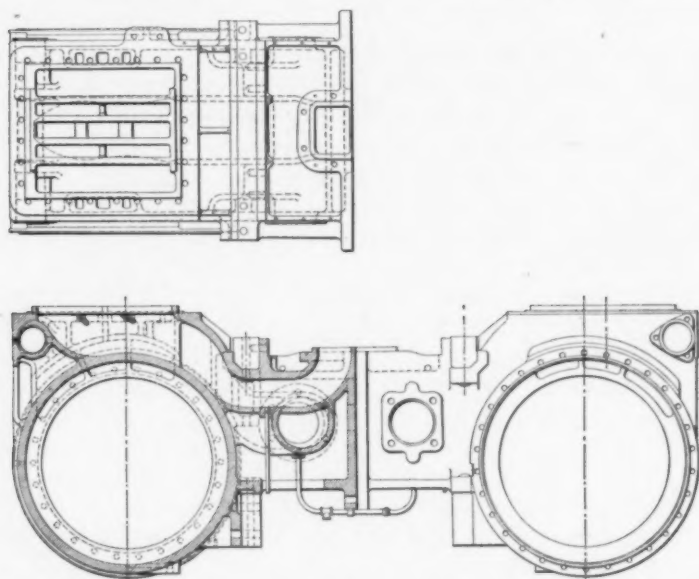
CROSS SECTION, FRONT AND PLAN VIEWS OF LOW PRESSURE CYLINDERS
